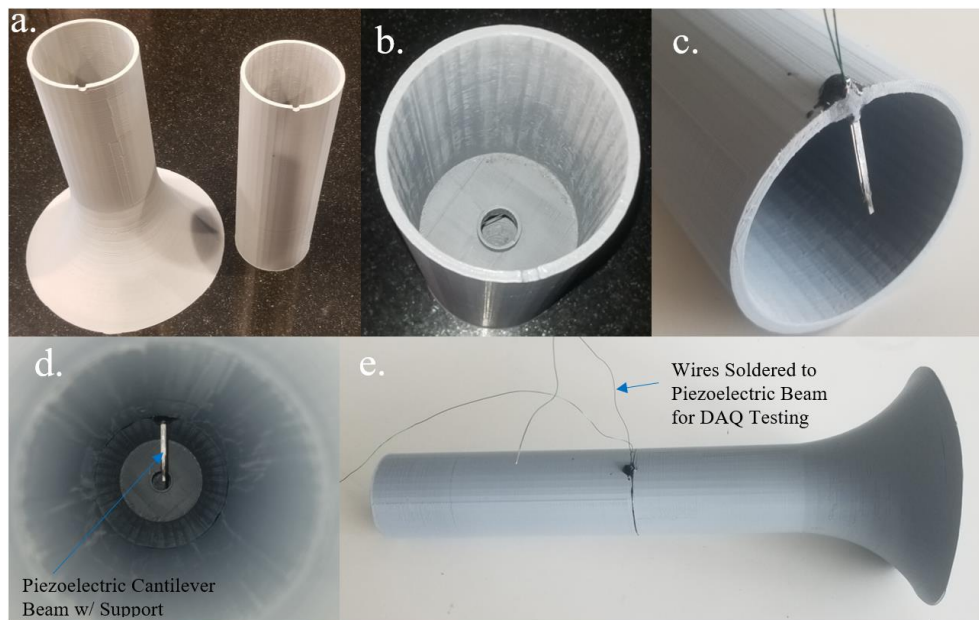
The 3D-Printed Device with Pictures of the Piezoelectric Mounting and Assembly Process.
